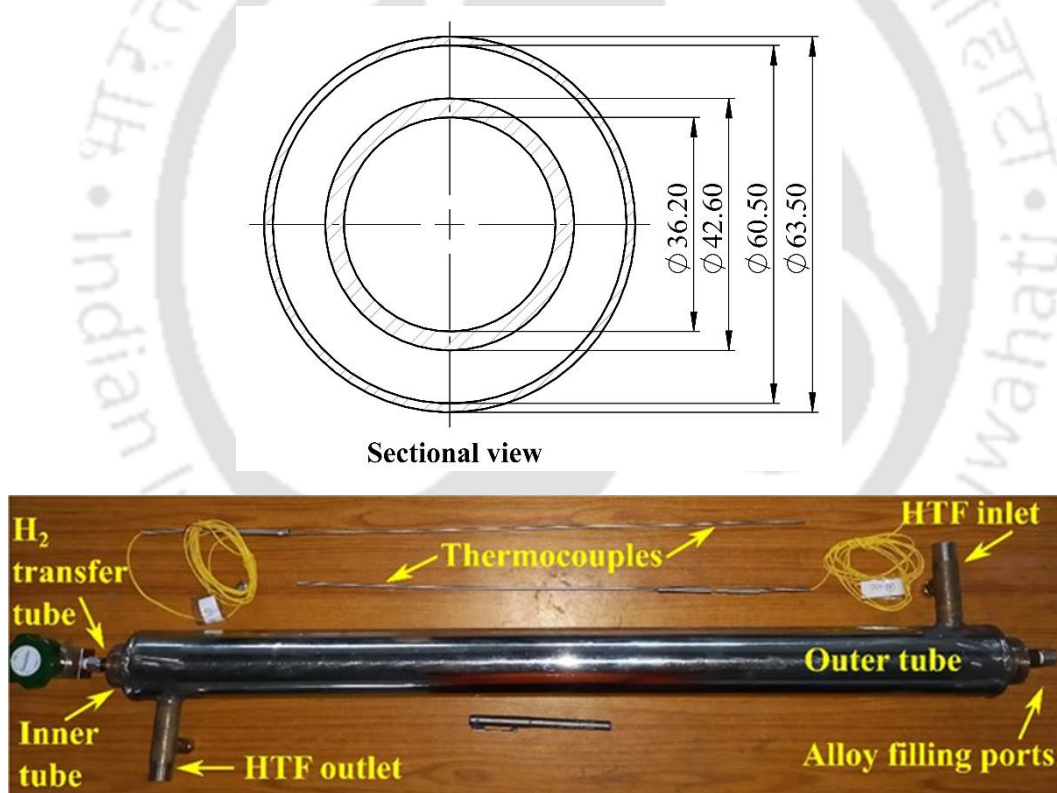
(a) Tube-in-tube reactor model sectional view and (b) photograph of the fabricated unit.
